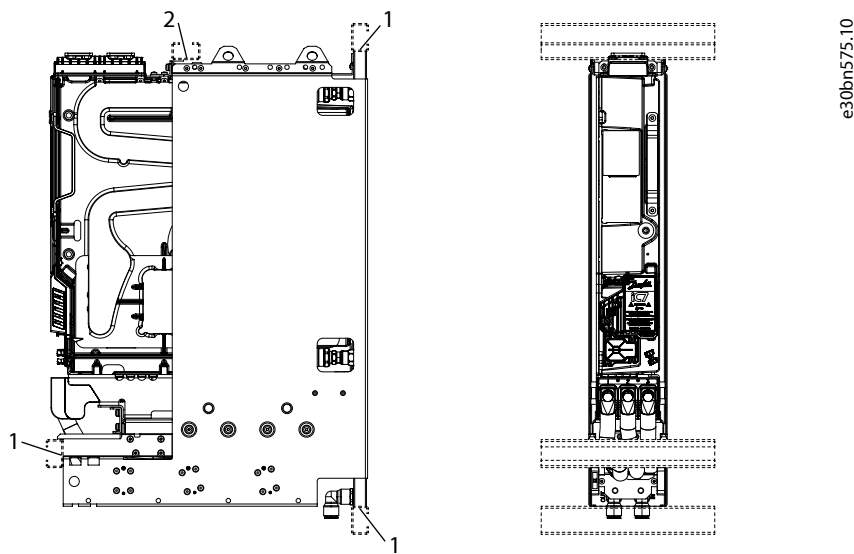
Mounting Holes of the System Module with Short Integration Unit (+AE01)
